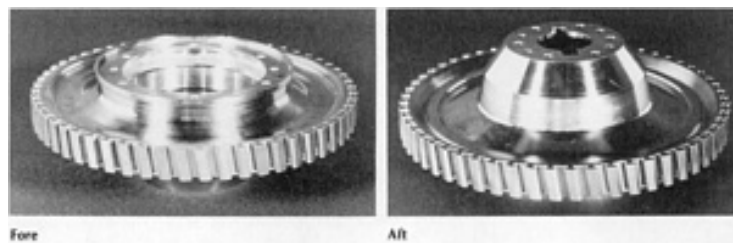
Fully machined P/M Udimet 720 turbine disk produced by extrusion plus isothermal forging. Courtesy of Allison Engine Company
